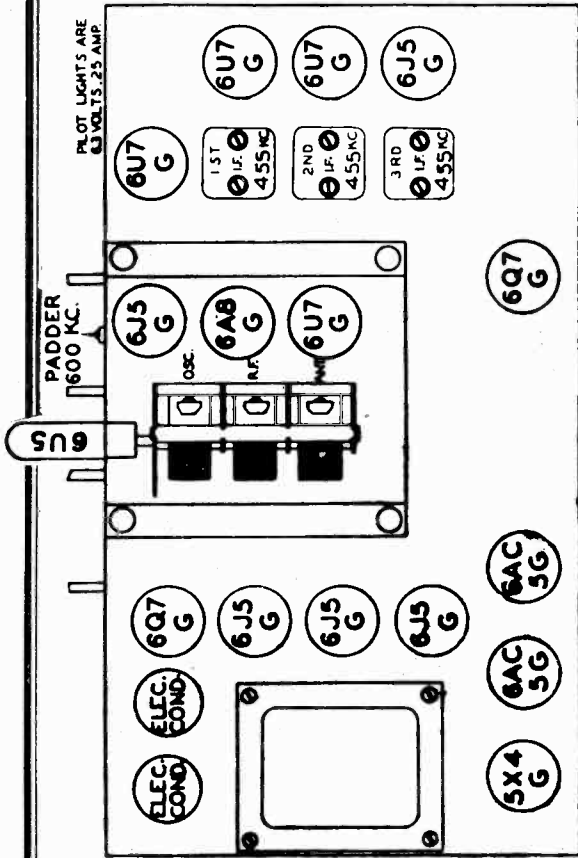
CHASSIS LAYOUT (TOP VIEW)
